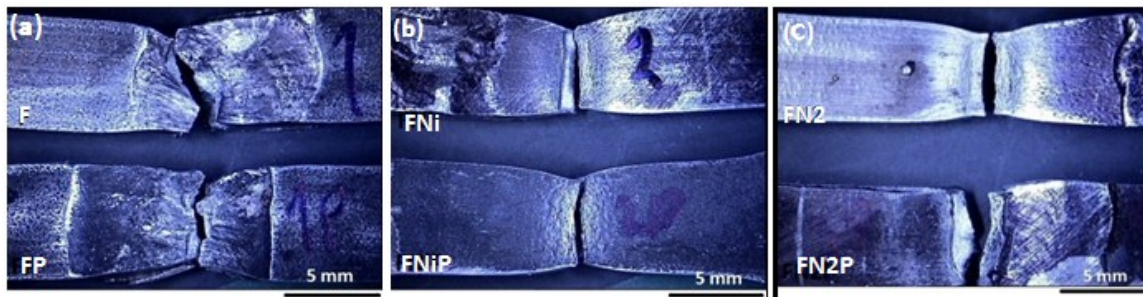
Streammacrograph of the fracture surface of the samples (a) F, FP (b) FNi, FNiP (c) FN2, FN2P
